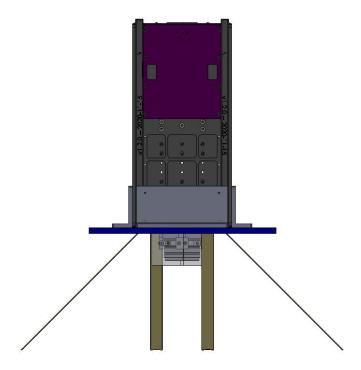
(2/2) CAD model of deployed turnstile antenna elements with the mounting plate. The angle of the antennas can be adjusted to prevent contact with the HASP system boom mounting arms.
